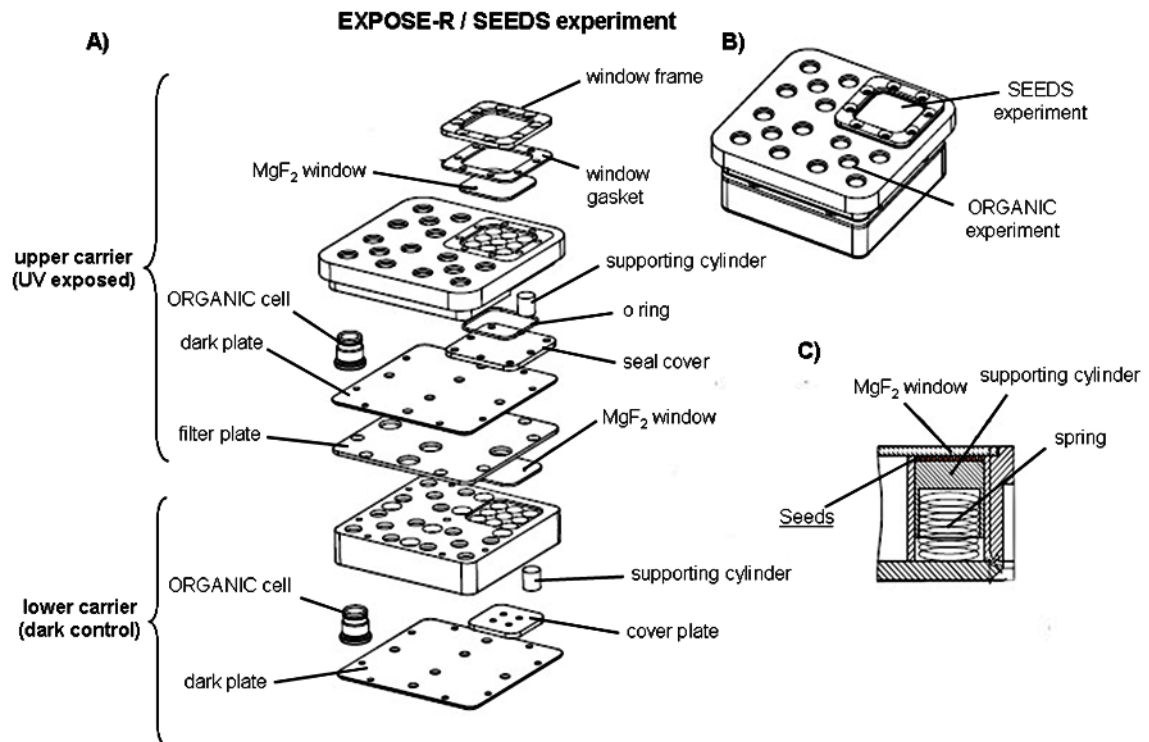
Design of the SEEDS sample carrier for EXPOSE-R mission. Drawing of the ORGANIC/ SEEDS sample carrier assembly (exploded view) (A). Assembled ORGANIC/ SEEDS sample carrier (B). Detail of the SEEDS sample cell loaded with seeds (cross-section drawing) (C) (extracted from technical drawings made by HTS AG., Wallisellen, CH).
